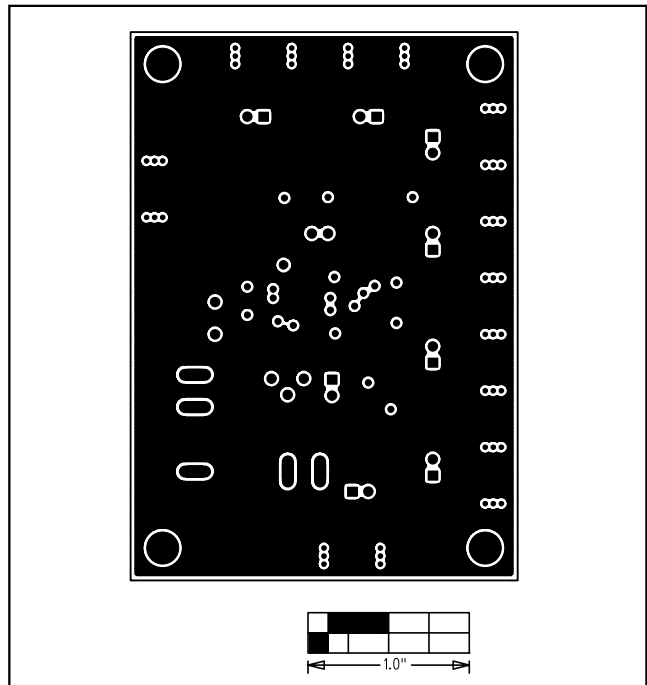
MAX9486 EV Kit PC Board Layout—Inner Layer 3 (DVDD Layer)
